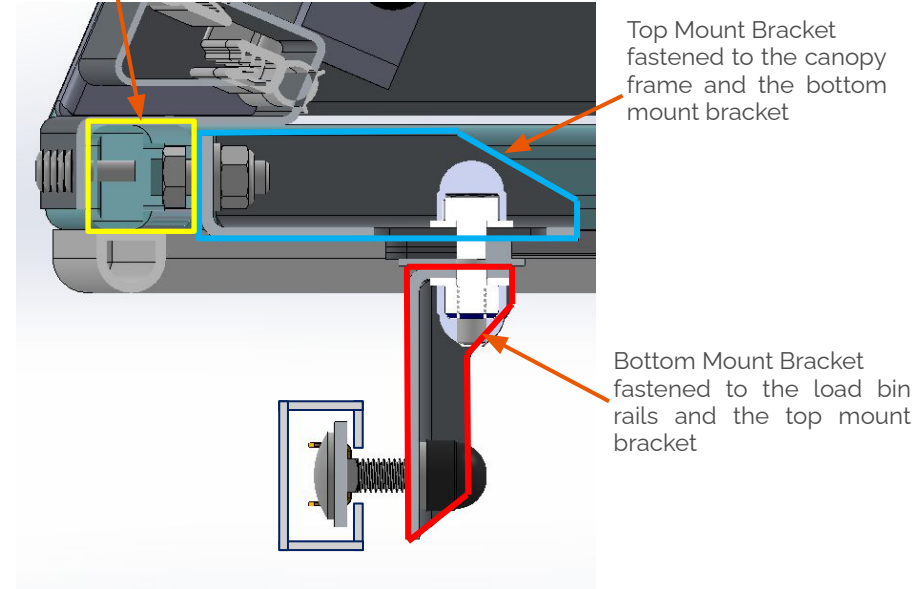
Fully Assembled Mounting Bracket Fastened to Canopy Frame
